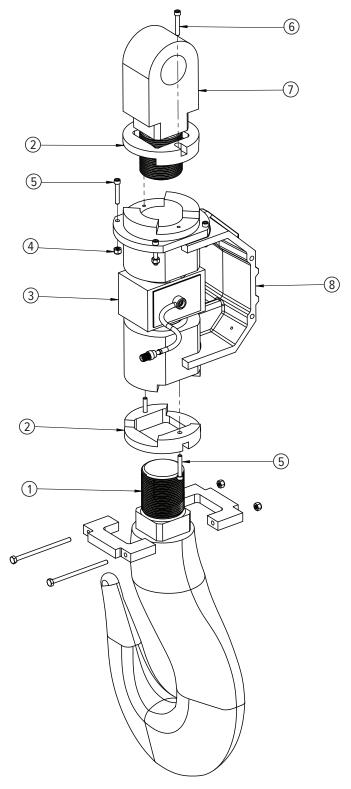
MSI-9600HT Mid-Section Assembly70,000 lb
